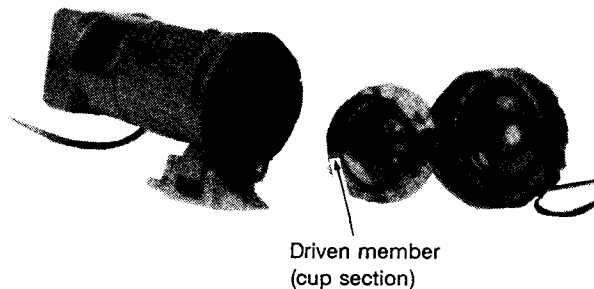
View of Motor after Bracket and Clutch Shaft Are Removed
